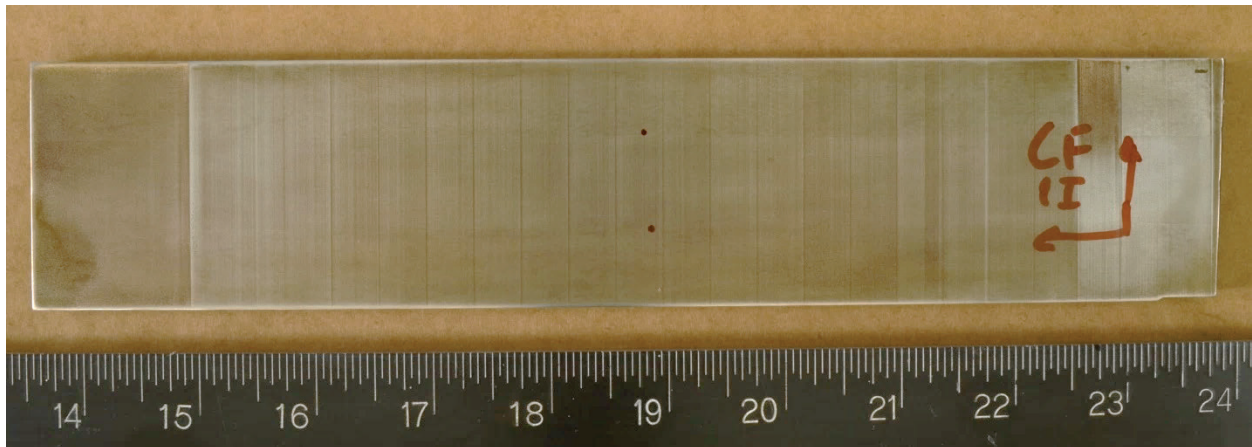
Row B slab cut (0.4 C(T)) illustrates the weld centerline of the CF Block [17].
